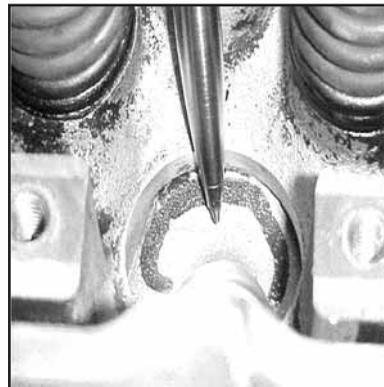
A possible coolant leak may occur between the cylinder head valve guide bore and the interior of the cylinder head casting on GM 4.8 and 5.3L engines.
